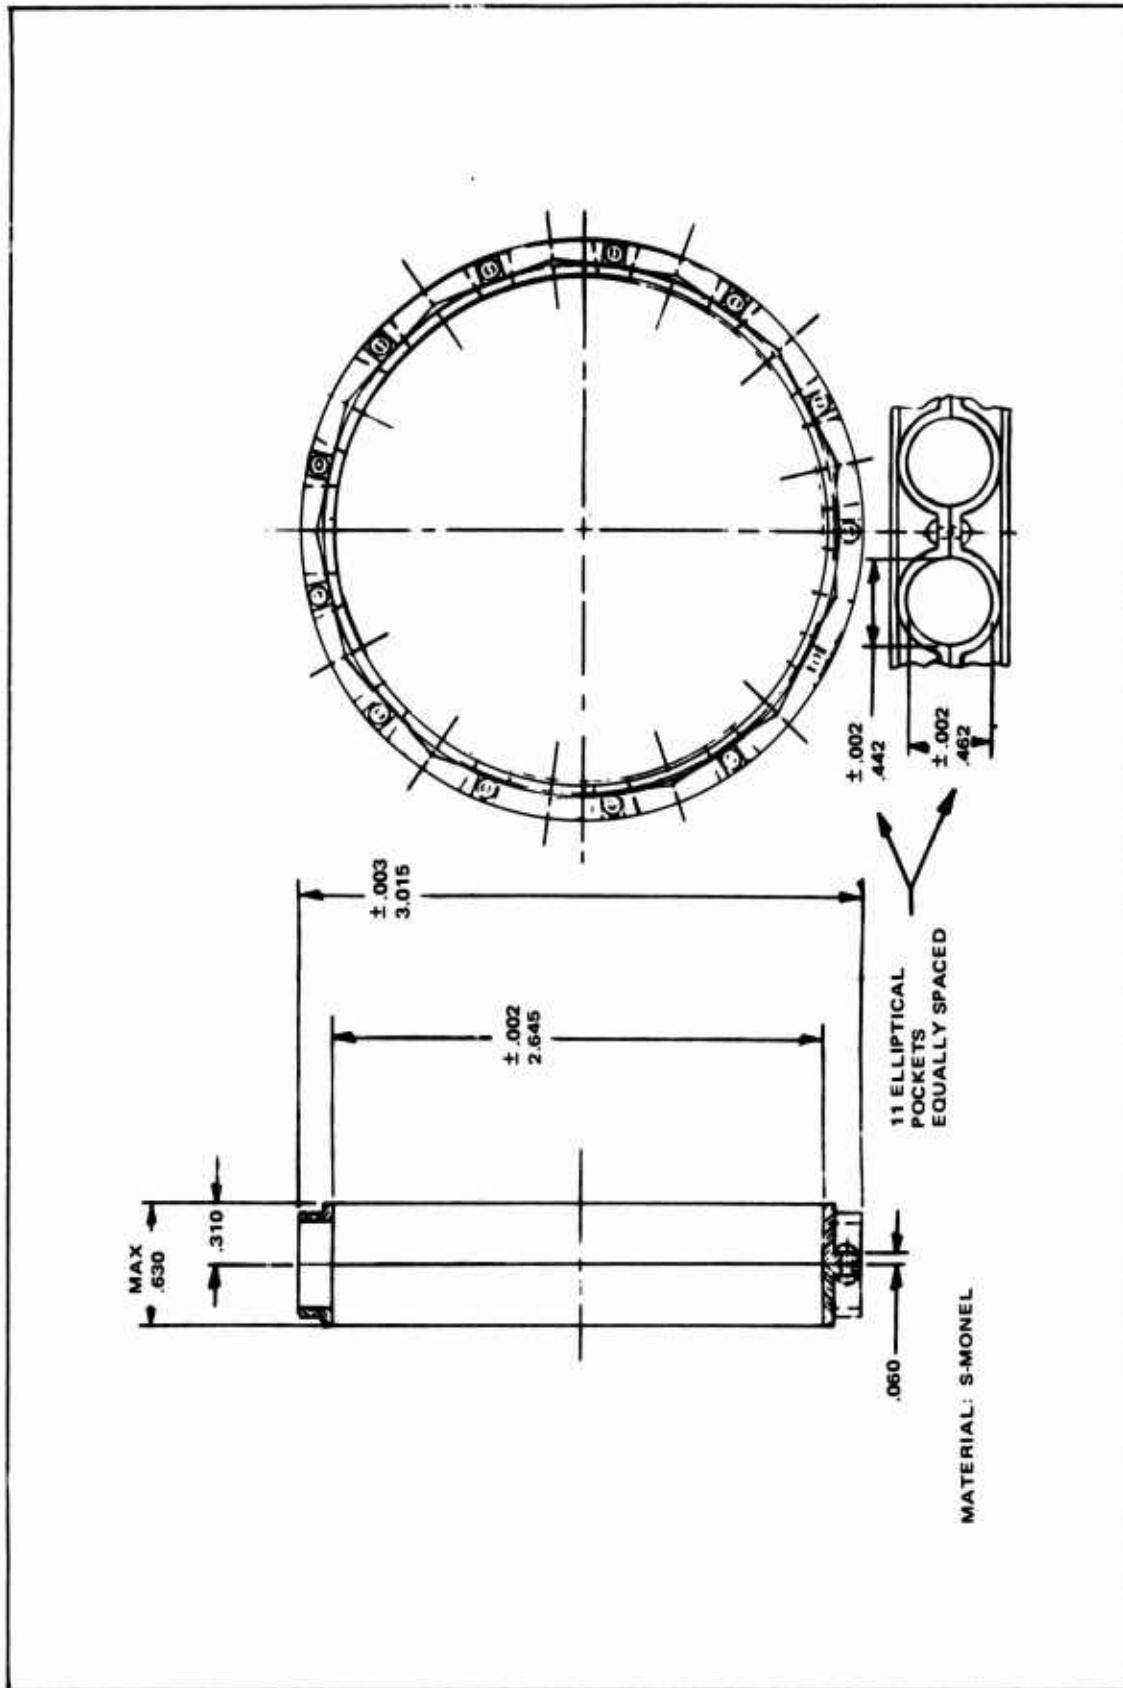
Machined Inner-Land-Riding S-Monel Cage, Design 5.
